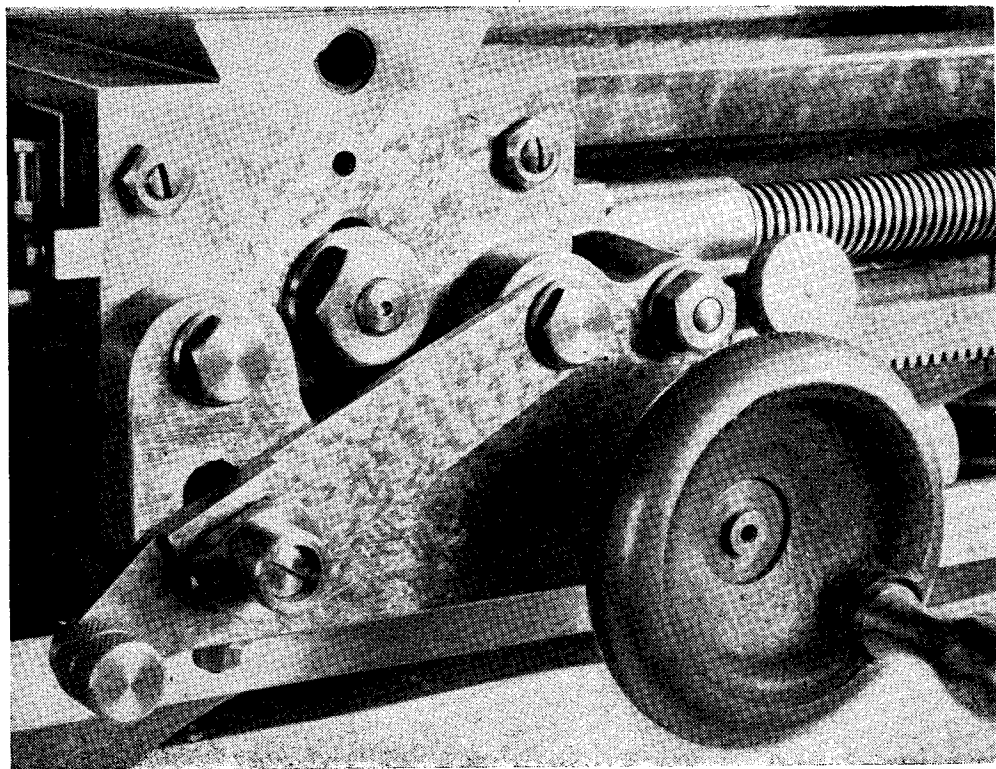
The modified leadscrew-nut control mechanism in the open position
